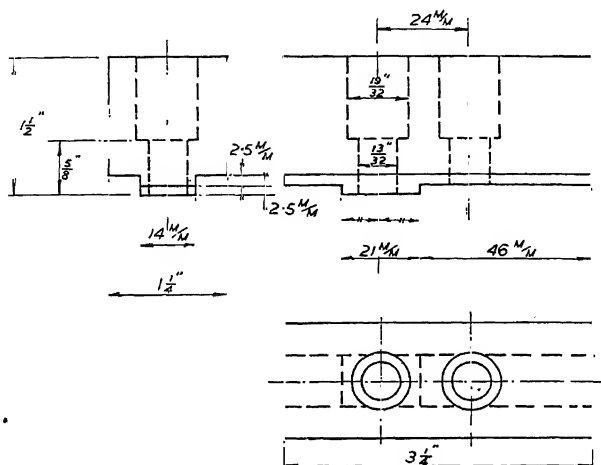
Soft jaw blanks for Harles 3-jaw chuck (with replaceable jaws). 7 1/2 in.
